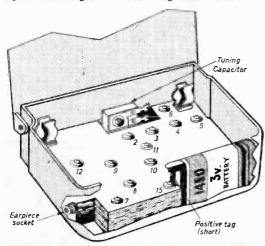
A view of the chassis mounted in its case, showing the positions of the battery, tuning capacitor and earpiece socket.
